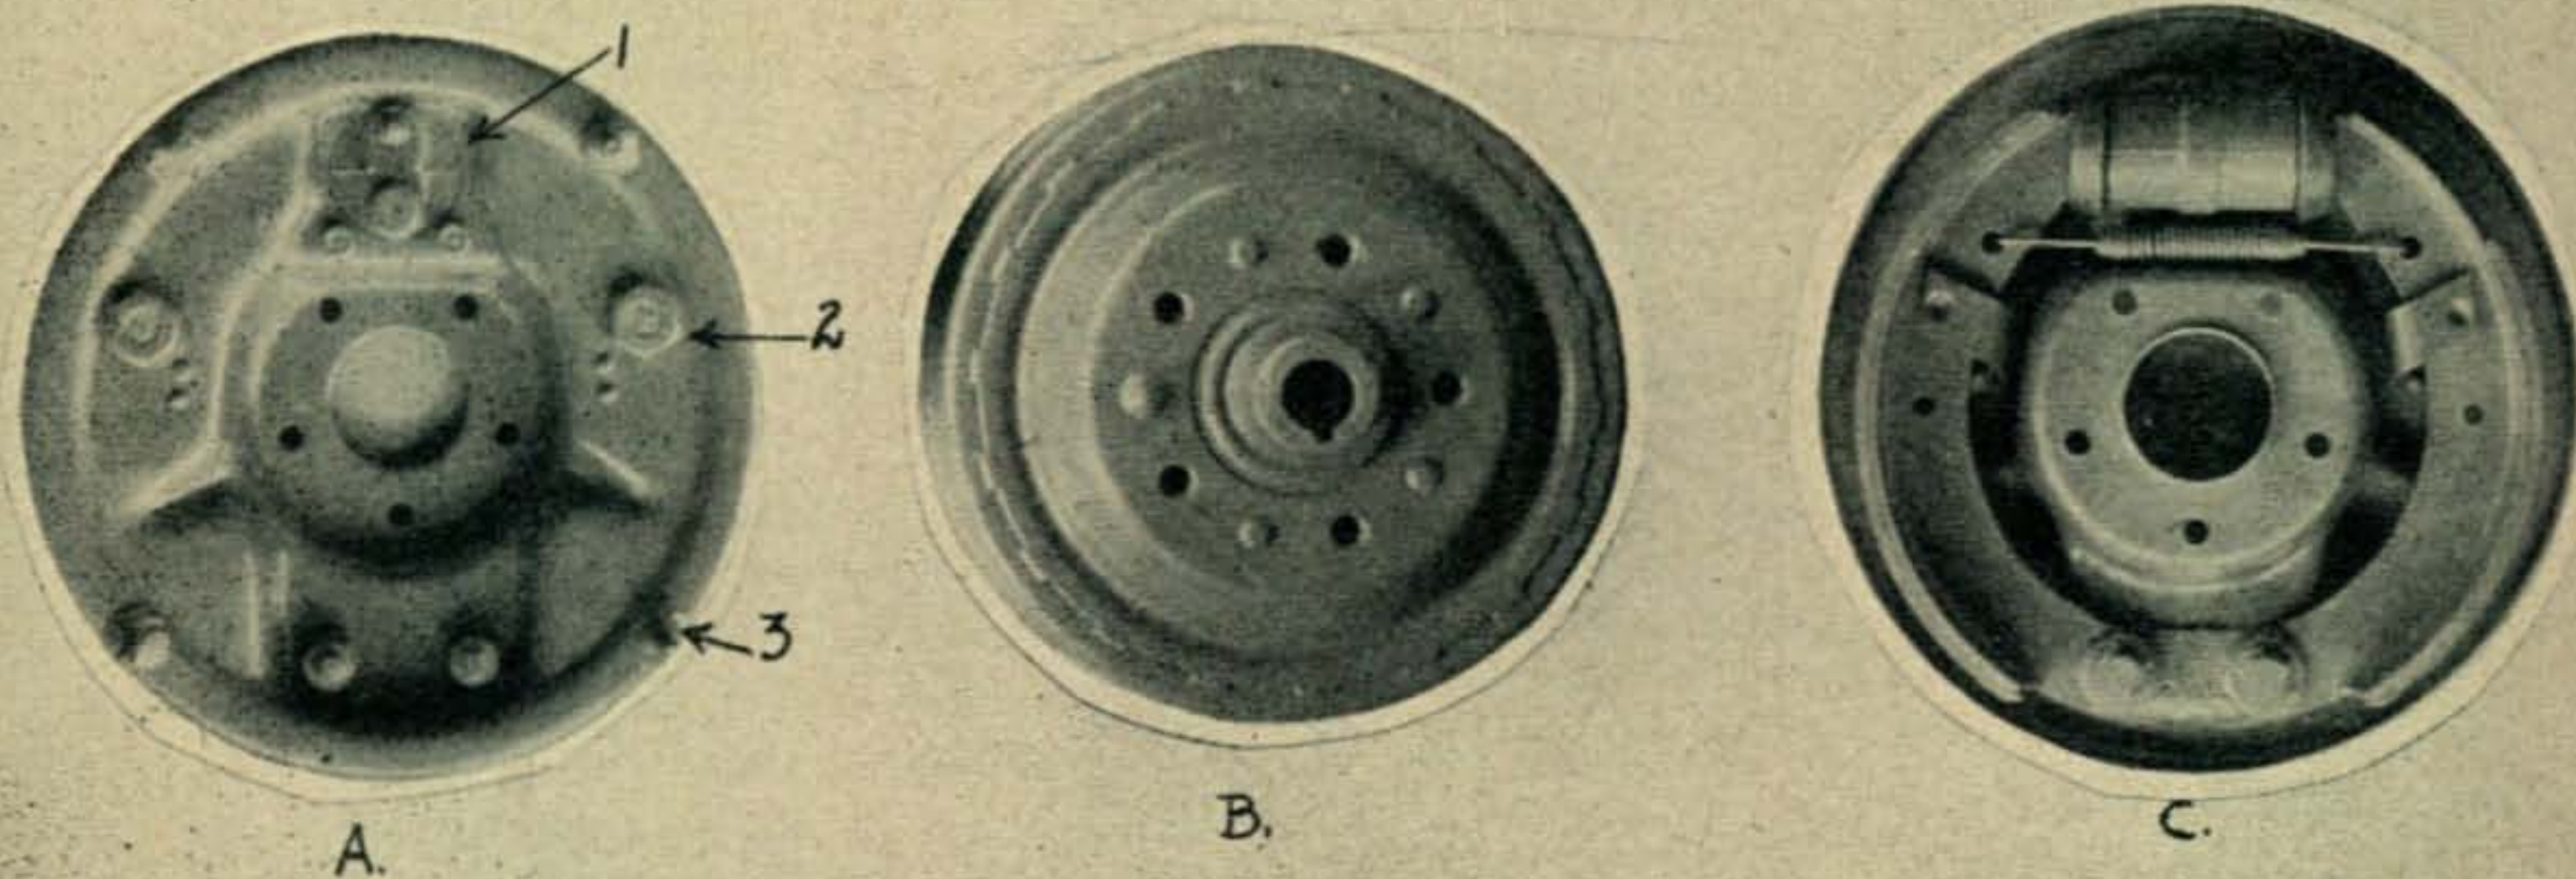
In A (1), escape valve on wheel cylinder; (2), brake clearance adjustments; (3), mounting studs. In B, wheel drum for supporting beam. In C, brake drum, showing cylinder and brake lining.
